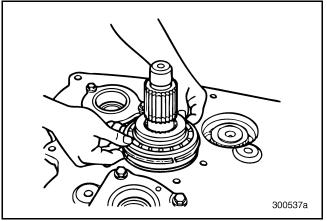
Removing Front Mainshaft Rear Bearing (T313L/T318L Shown)
